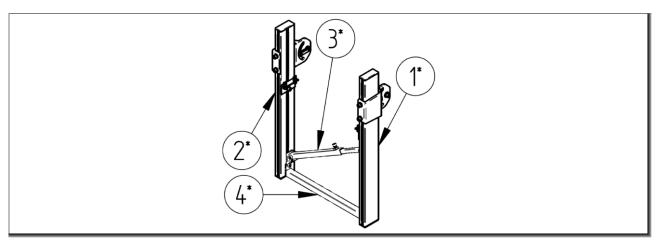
Parts list: Conveyor support AM 140 ZZ.982.0106.00
